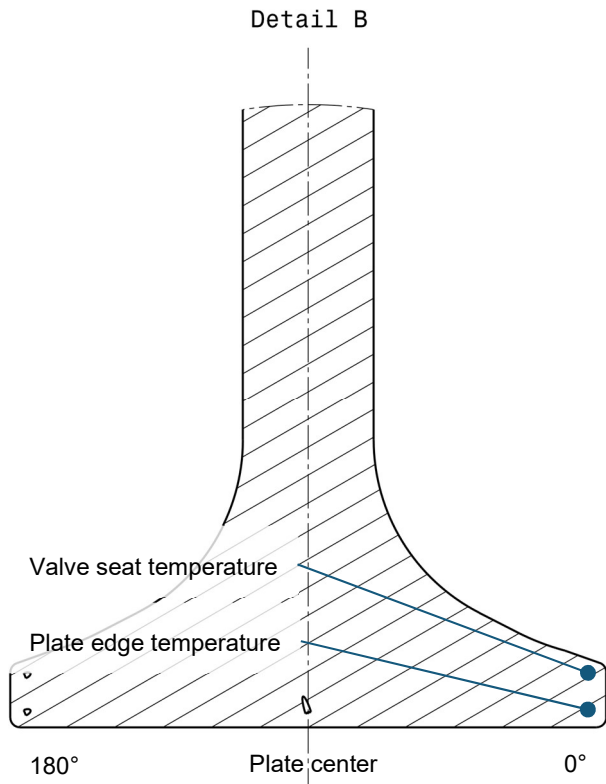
Exhaust gas valve cut-out with temperature measurement positions, Detail B
